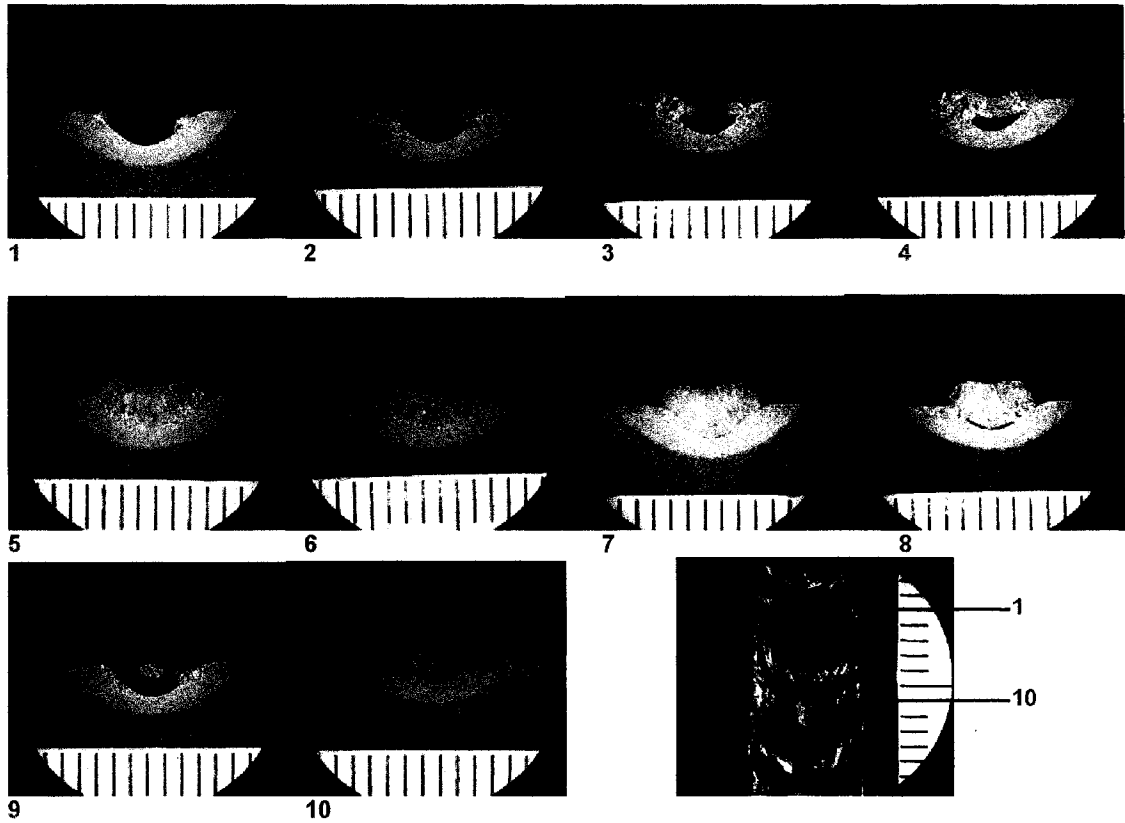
Weld G4 Cross-section Macro-images of Bead Humps
